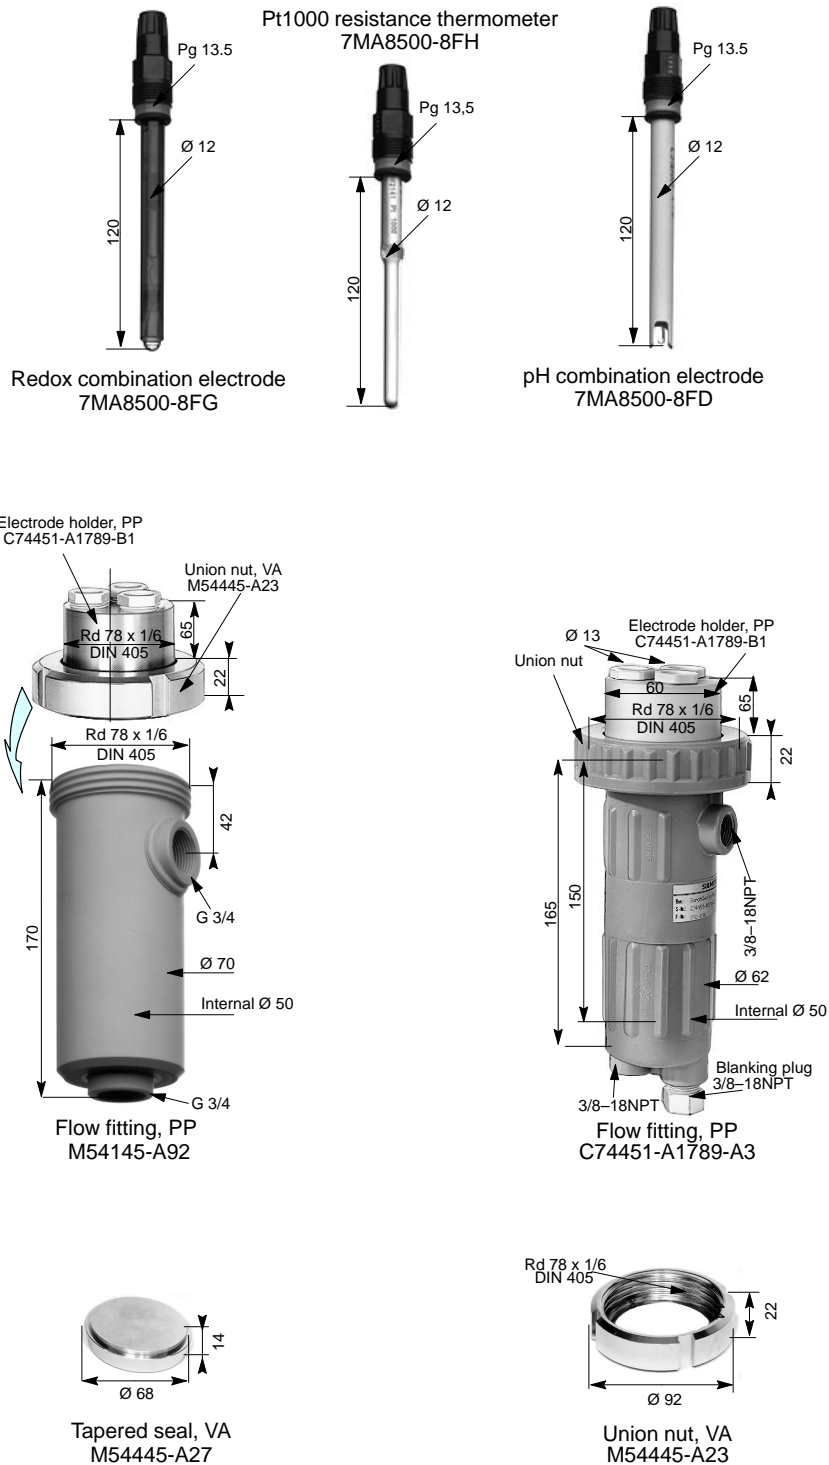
/22 Sensors and fittings for pH and ORP measurements, for standard applications, dimensions in mm
